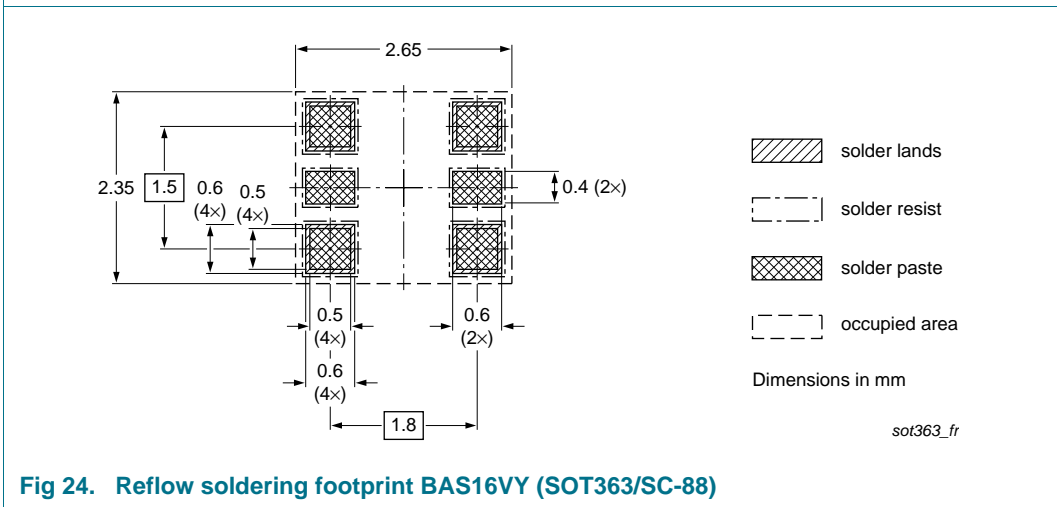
Reflow soldering footprint BAS16VY (SOT363/SC-88)
